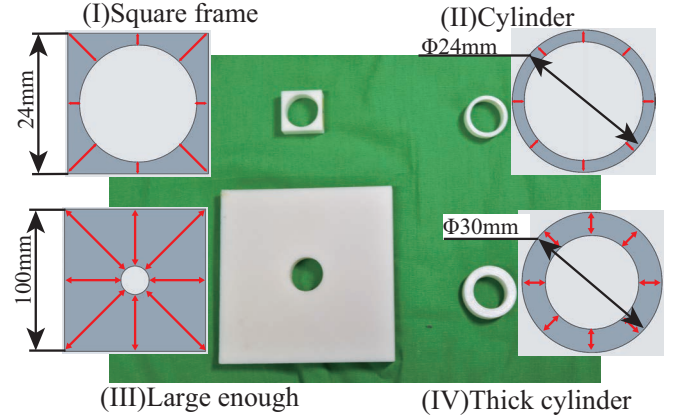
Samples used for measurements. Ten of each of these were printed on three different 3D printers.
